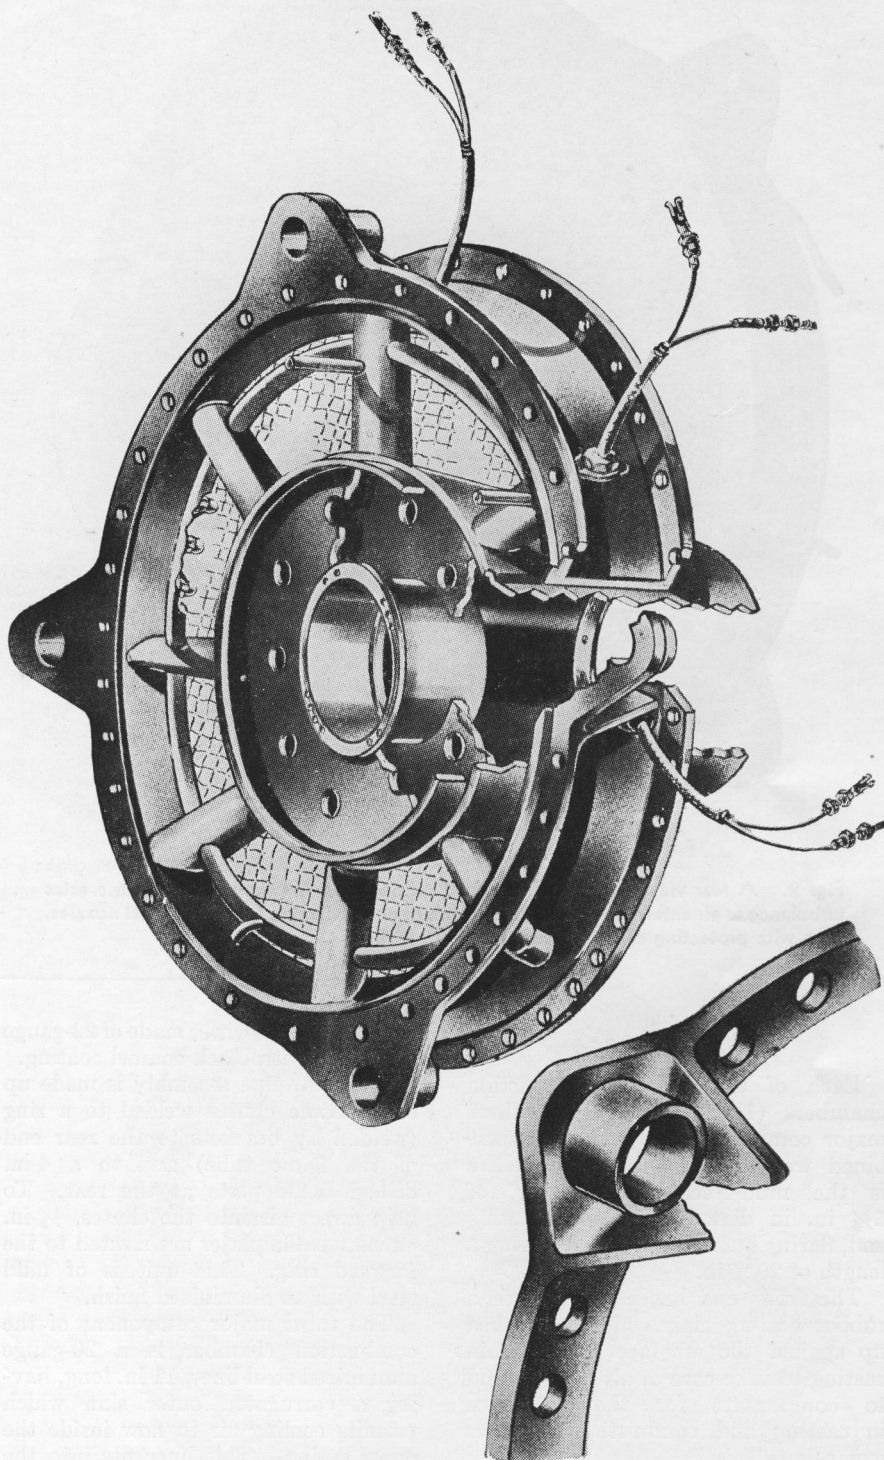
The backbone of the Yankee 19-B is the built-up fuel manifold and thrust bearing support, shown in R. W. Hibbs sketch. On the outer single-walled ring are four mounting lugs which can support full engine loads. The smaller ring inside serves both to split and streamline the air entering the combustion chamber, and to support 24 fuel nozzles. The inner ring contains thrust bearing housing. Seven of the eight faired hollow struts house passages for thermocouples and oil lines.
